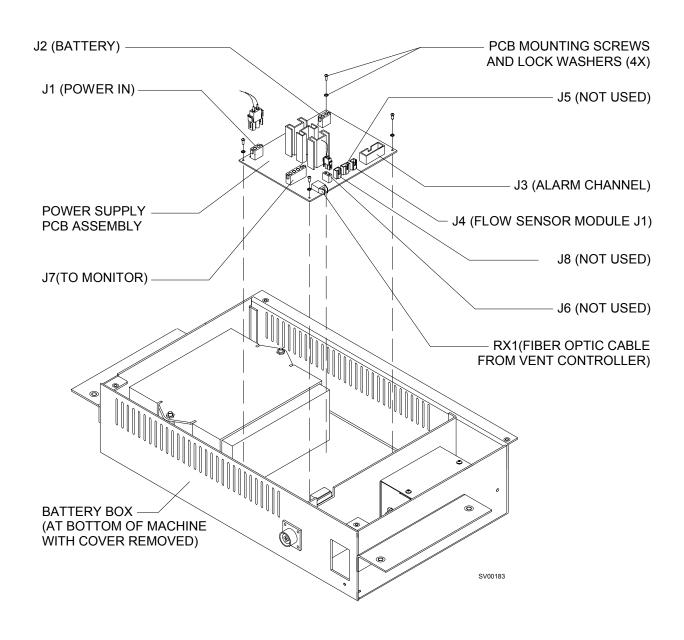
A. Power Supply PCB Assembly: Later Models with VPO Monitor
